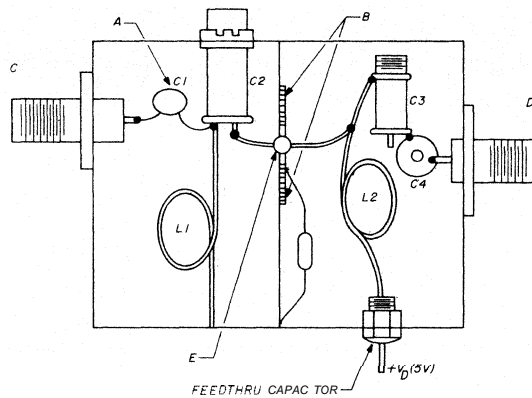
Parts layout and assembly drawings for the 144-MHz preamplifier.
